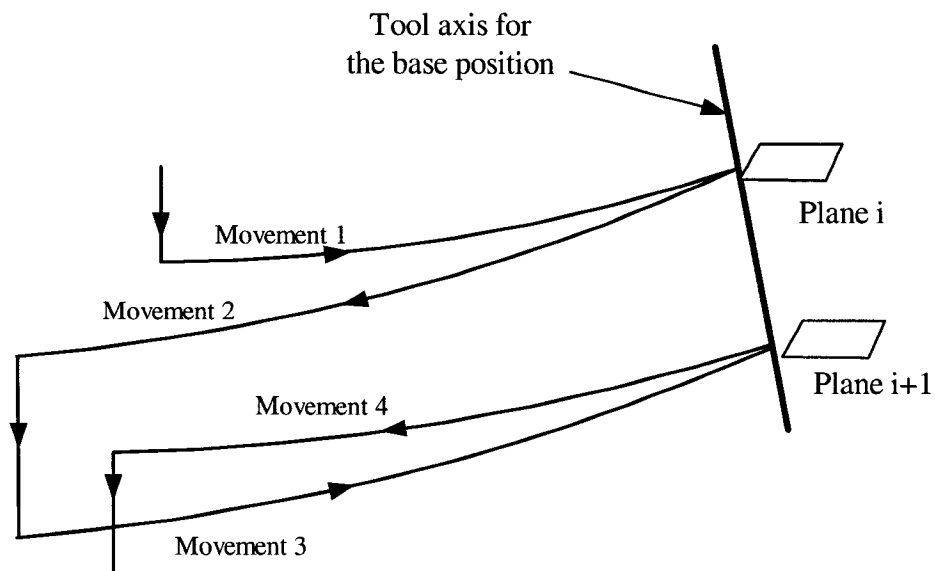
The four movements of the tool centre in two consecutive axial levels of machining
